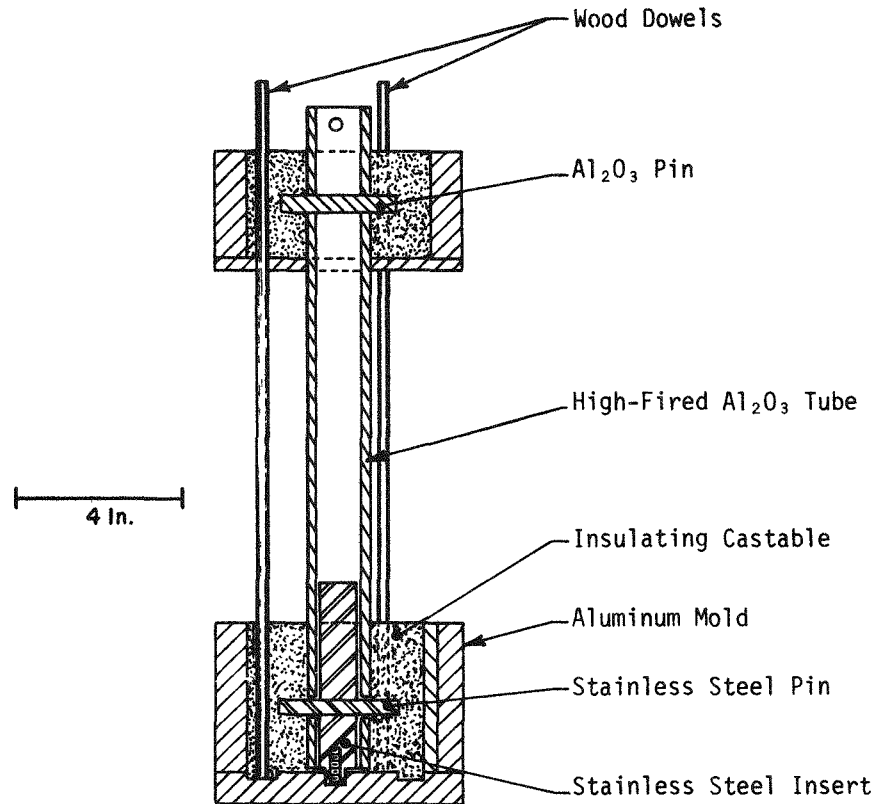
Cross-Sectional View of Ceramic Hearth and Mold
